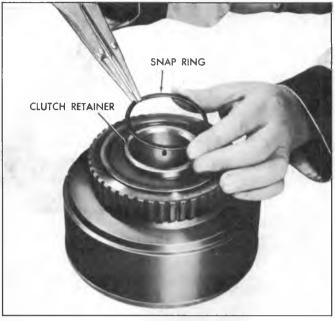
T--Removing Intermediate Clutch Retainer Snap Ring
